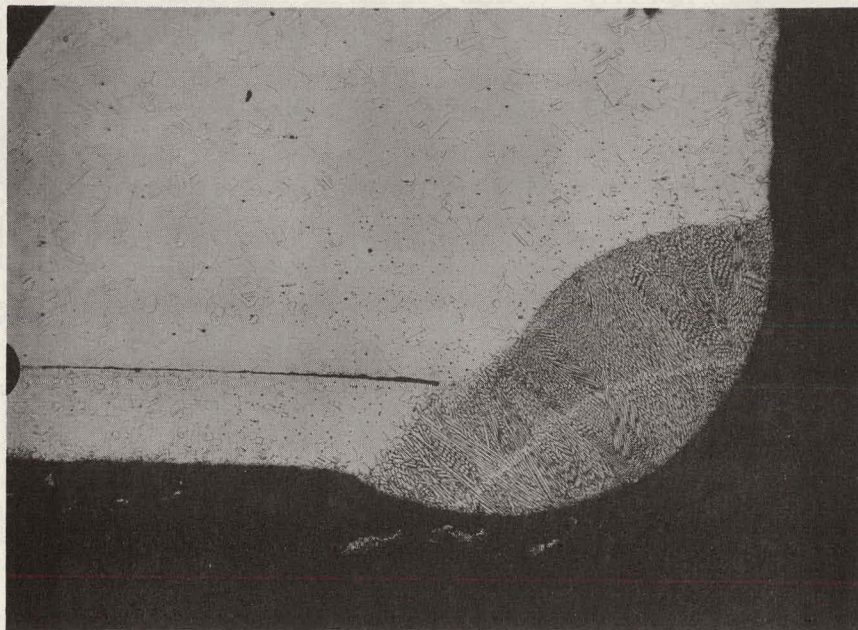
Microstructure of Reduced Shoulder Type End Closure Weld.
